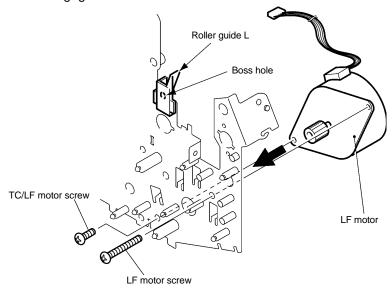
Reassembling the Left Side of the Chassis
